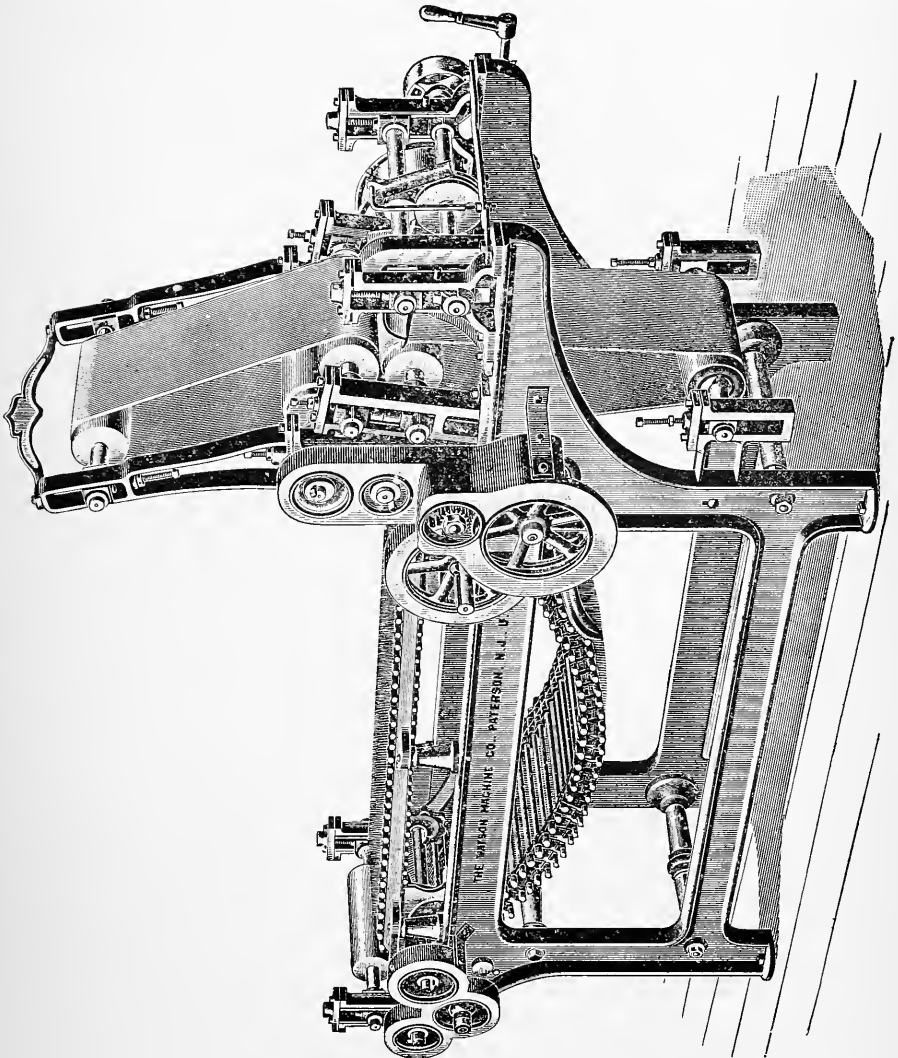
Apron head chain-bar drawing frame for Manila.
